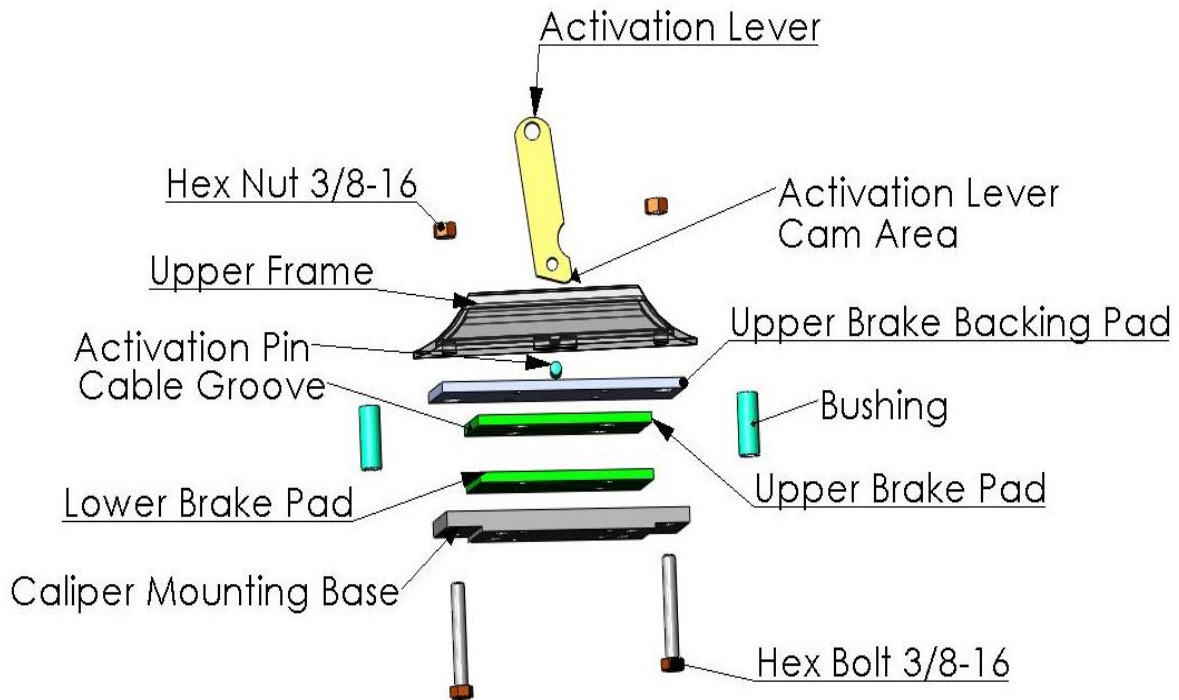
Exploded view of modified brake caliper. The springs and brake pad retaining screws are not shown for clarity.
